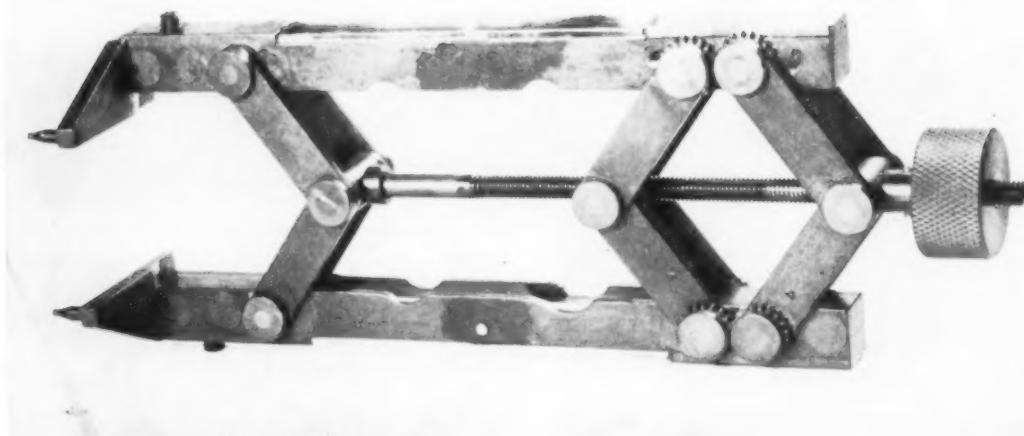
Special tool for inserting retaining rings. Tips are interchangeable for different types of rings.
